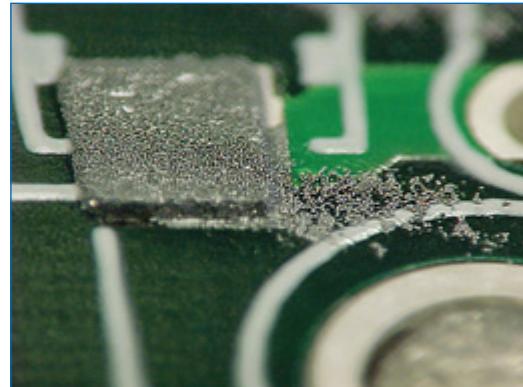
Solder paste print with stray solder paste particles on the surface of the solder mask.
